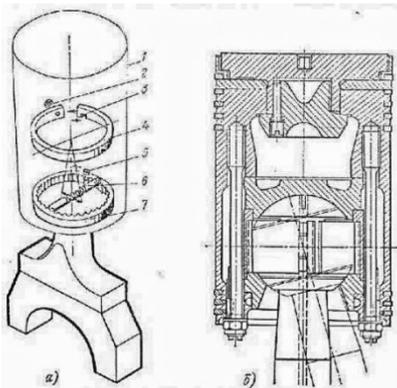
Piston of the Sulzer engine: a) a sketch of the mechanism of rotation of the piston; b) piston design
